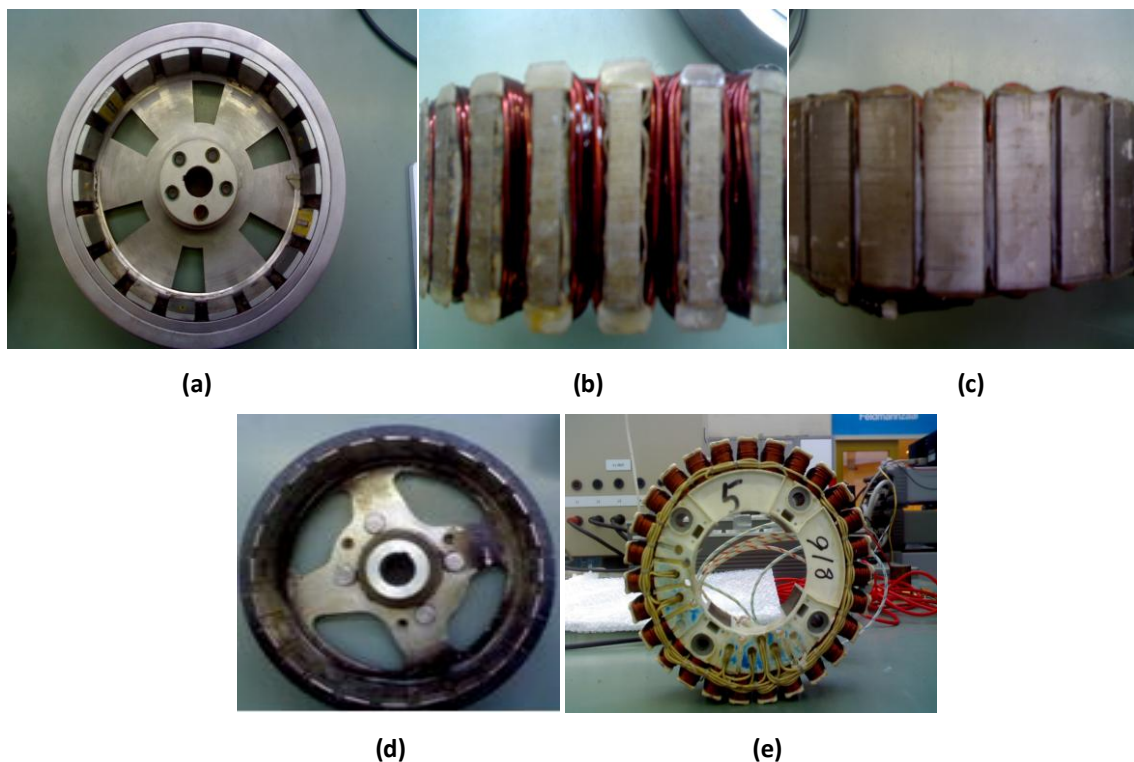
(a) Machine I and II rotor (b) Machine I stator (c) Machine II Stator (d) Machine III rotor
